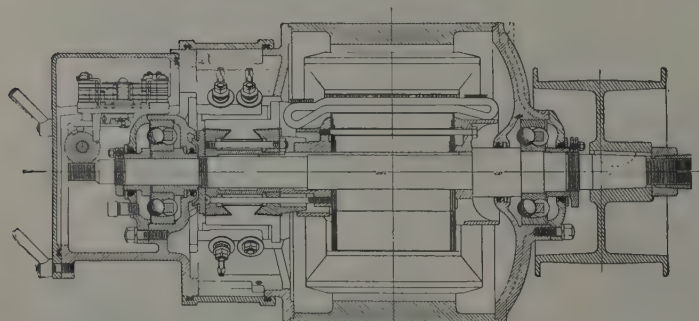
Section Through Type D-5 Ball Bearing Dynamo.
